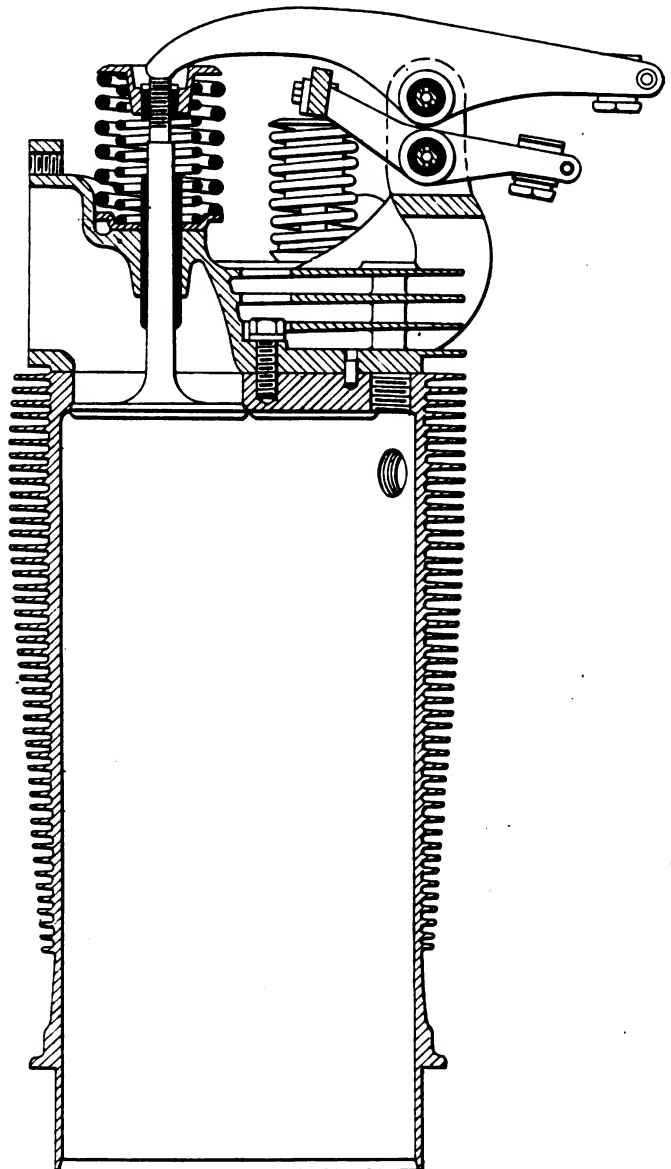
SECTIONAL ELEVATION OF A 5½ X 6½-IN. STEEL CYLINDER WITH AN ALUMINUM CAP
